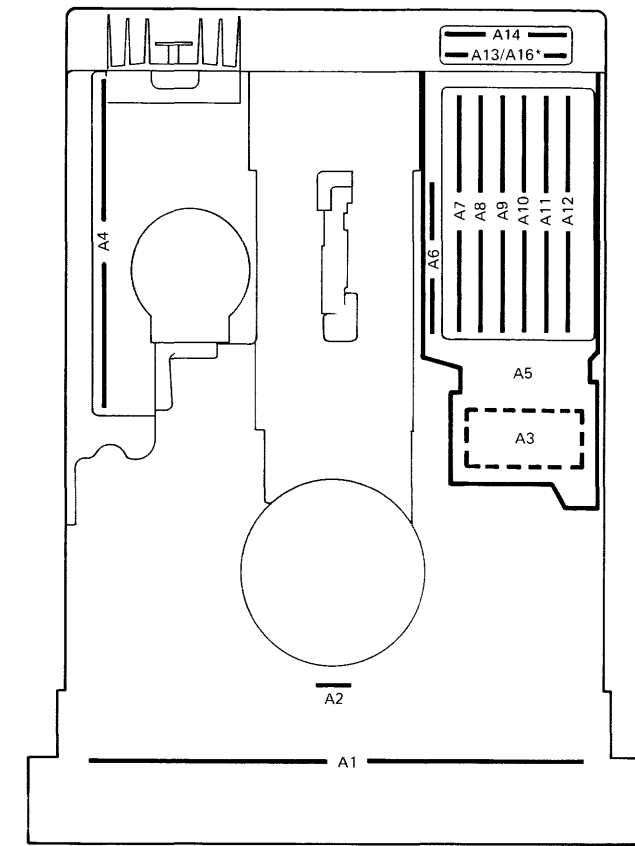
Disc Drive Chassis, Wiring Diagram
